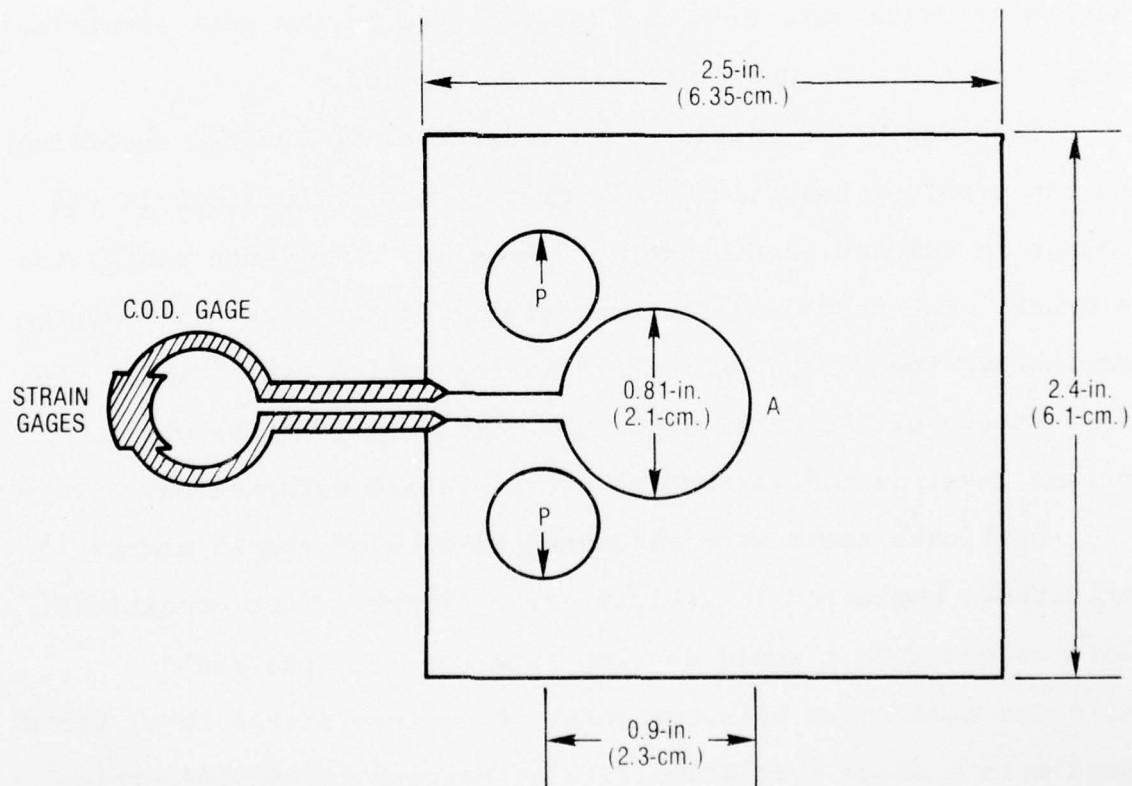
Compact Tension Keyhole Specimen For Fatigue Crack Initiation Testing.
